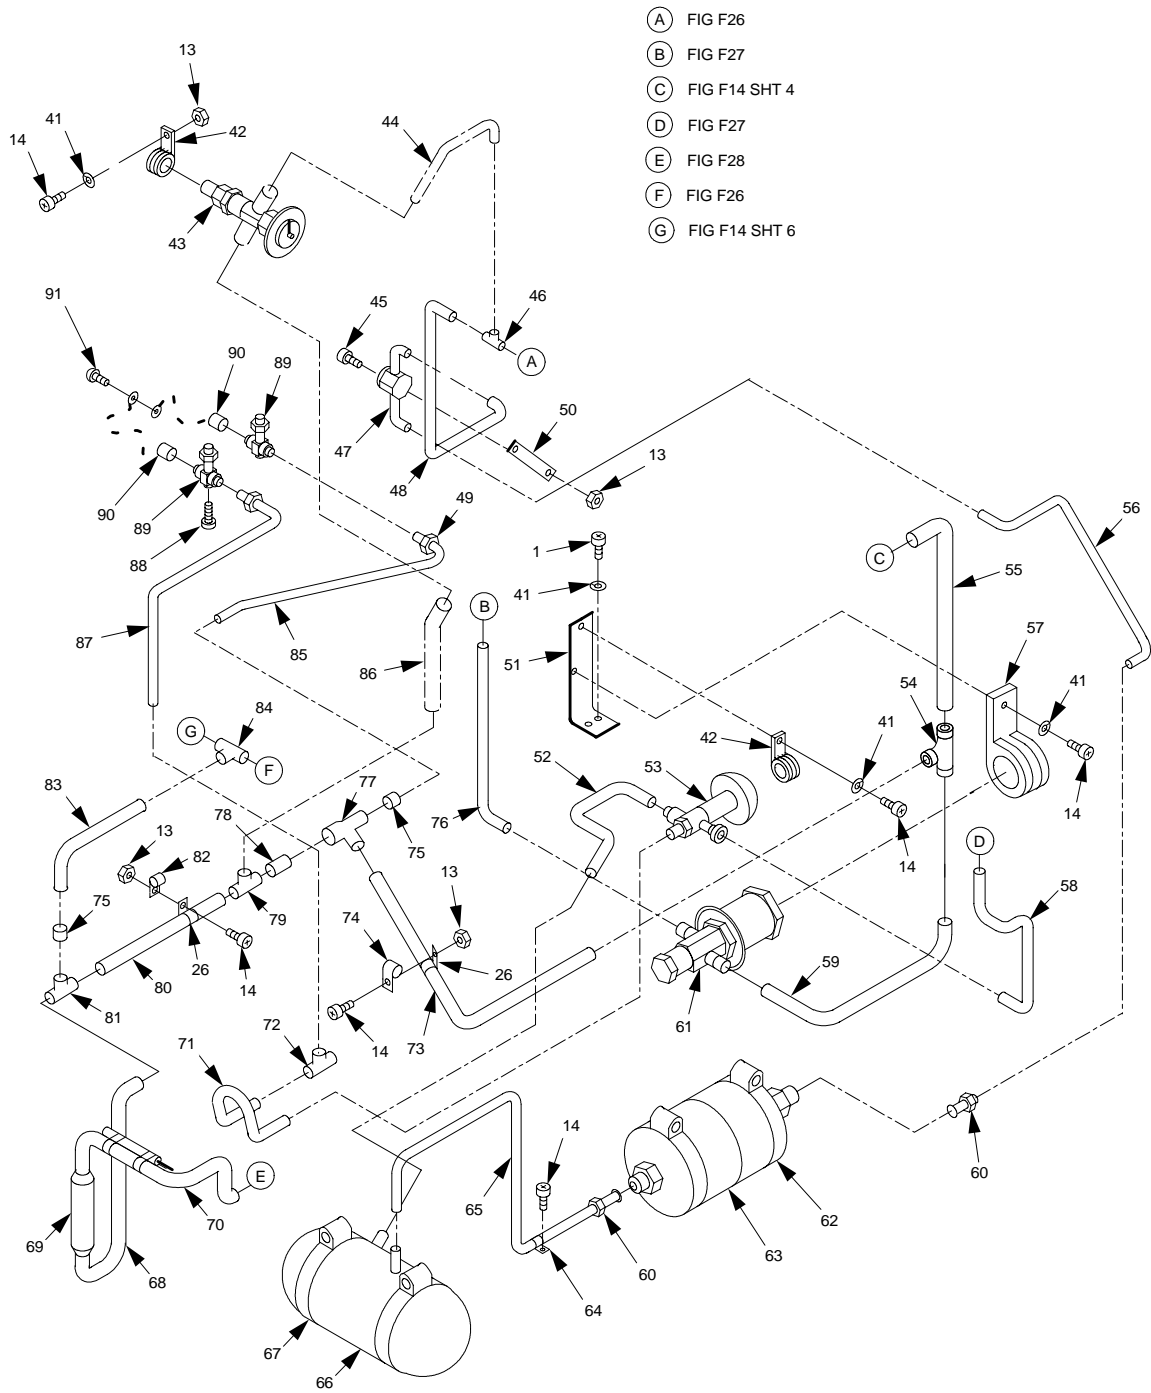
Condenser Assembly (Sheet 5 of 6)
